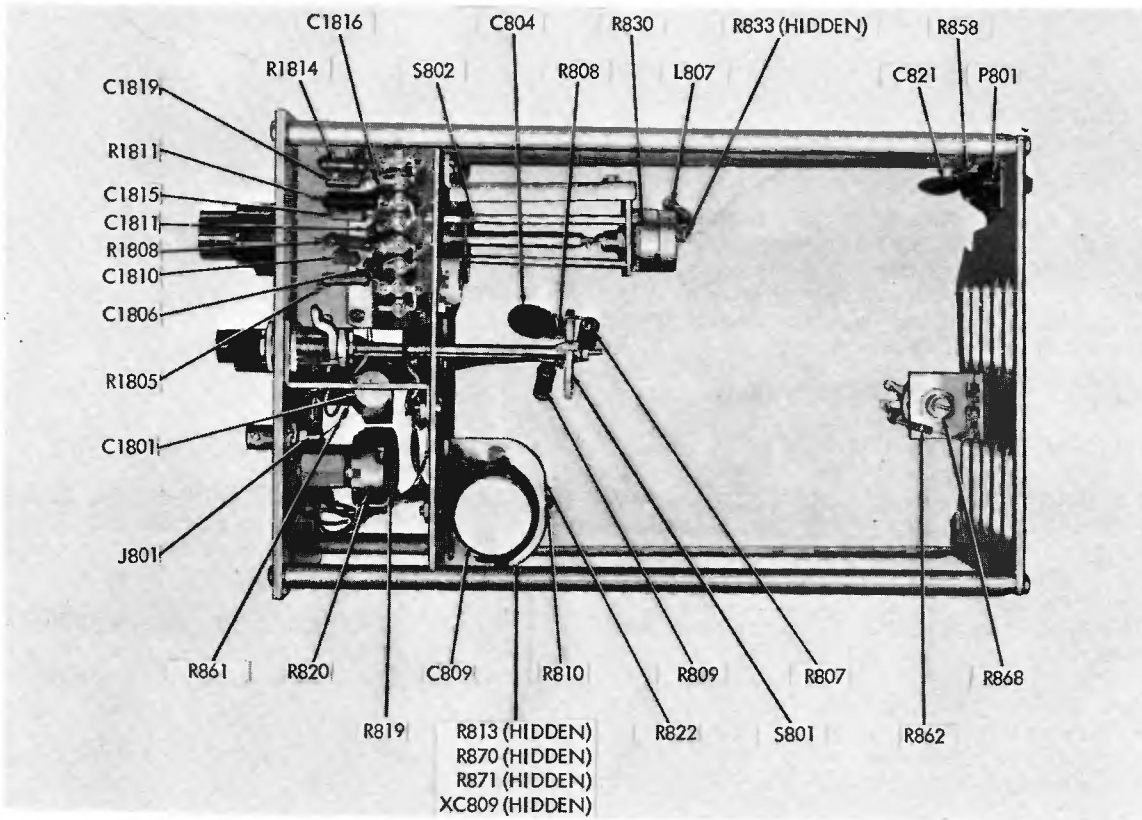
Location of parts, Right Side, AM-3568A/USM
